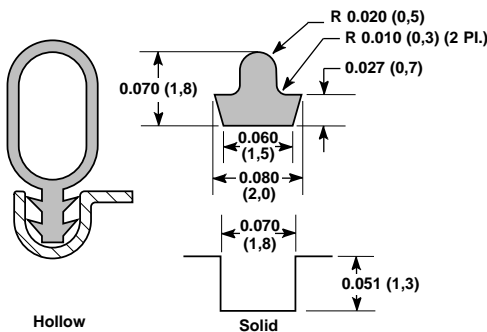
Vulcanized Mounted and Frame Mounted Gasket
